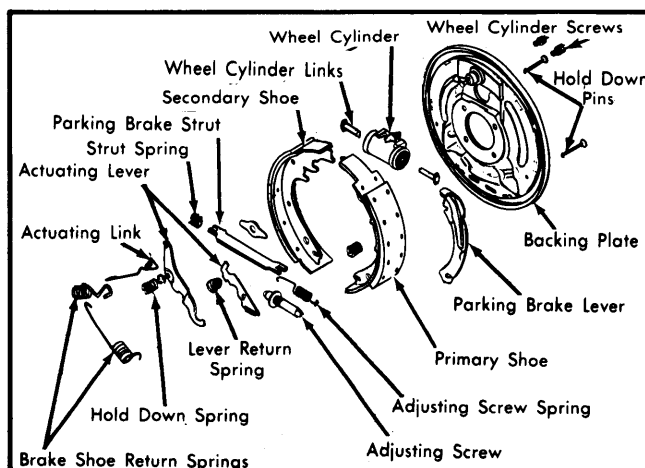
Exploded View of Rear Drum Brake Assembly (All Other Models)
